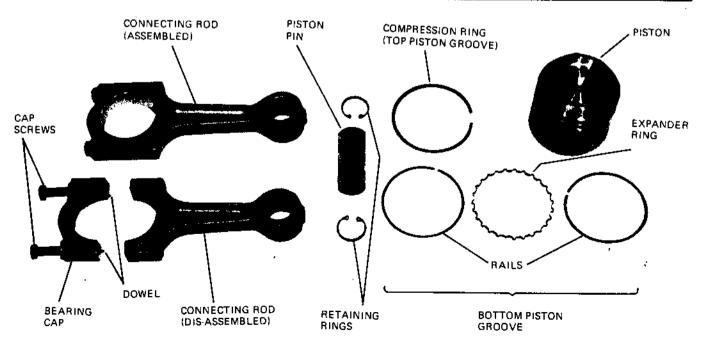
PISTON AND CONNECTING ROD COMPONENTS
